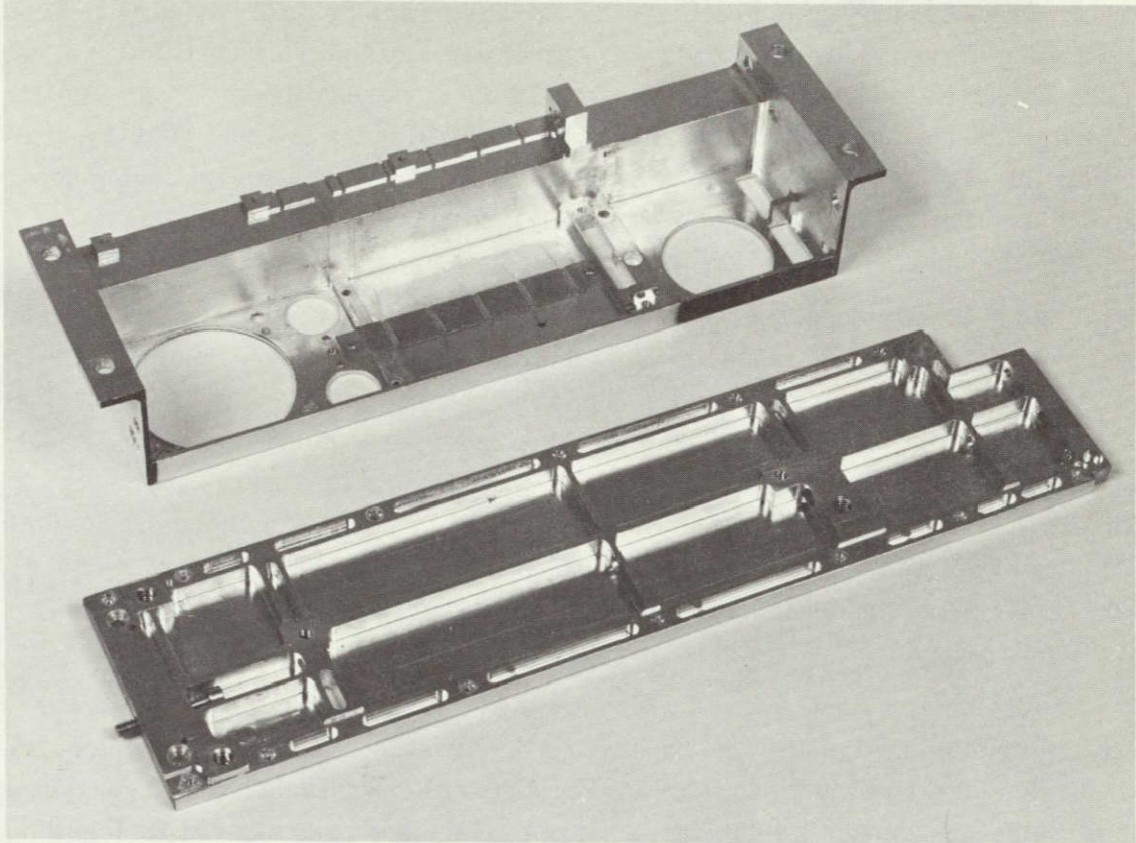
Front Plate and Right Side of the Experiment Housing
